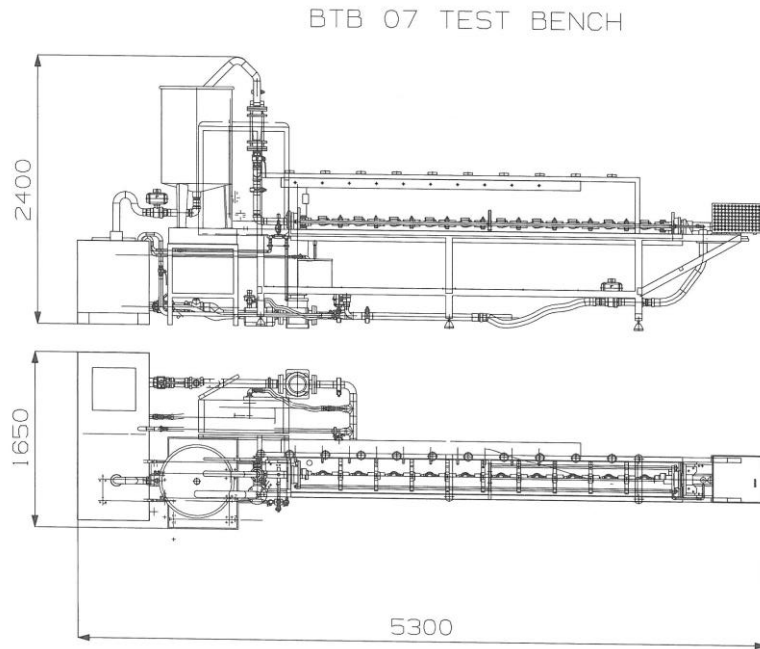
BTB-07 DN15-DN25 Single Line Test Bench Dimensioned Technical Drawing
